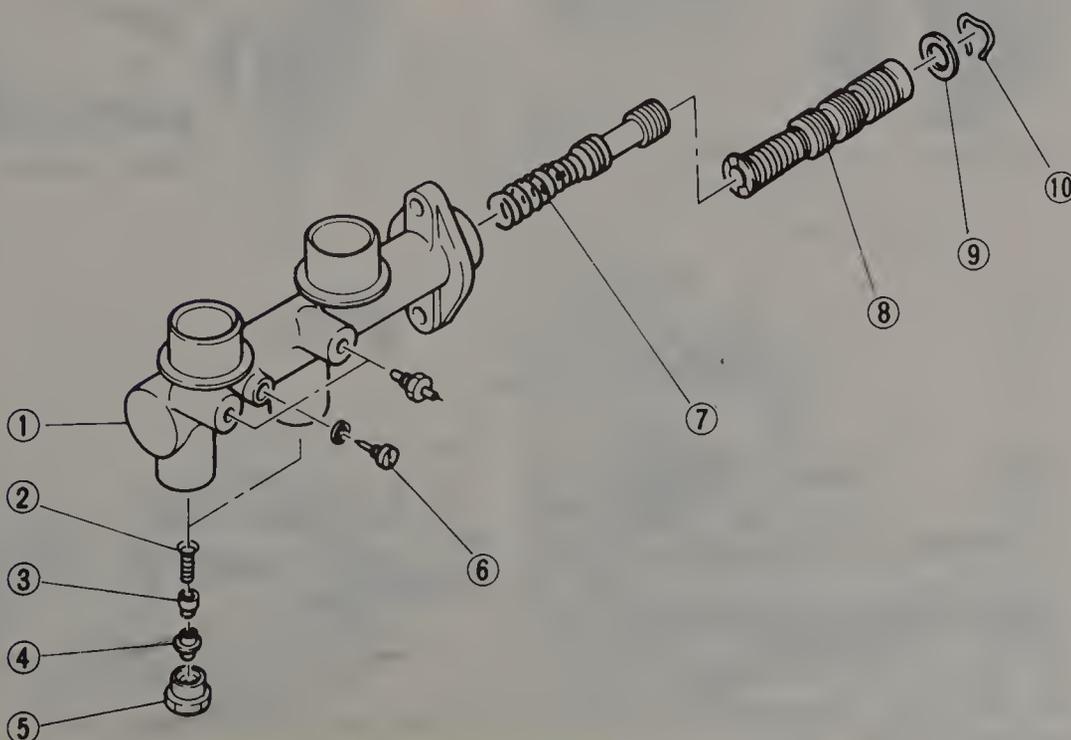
Master cylinder components – exploded view (Sec 15)
